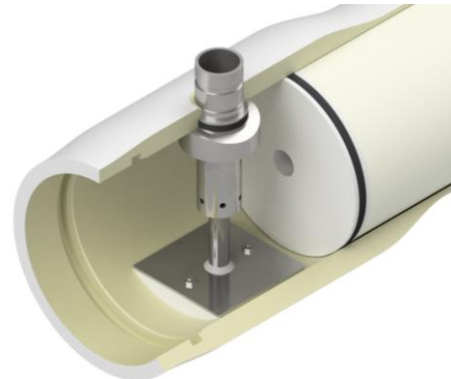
It is very important to properly align the guiding tool inside the pressure vessel.
